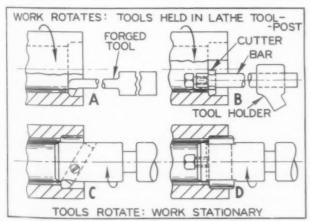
Typical plain boring tools. A and B are lathe boring tools, the one a forged tool, the other a bar with inserted bit. C and D are stub boring heads, the former taking an inserted single-point bit, the latter a 2-edged cutting blade.
